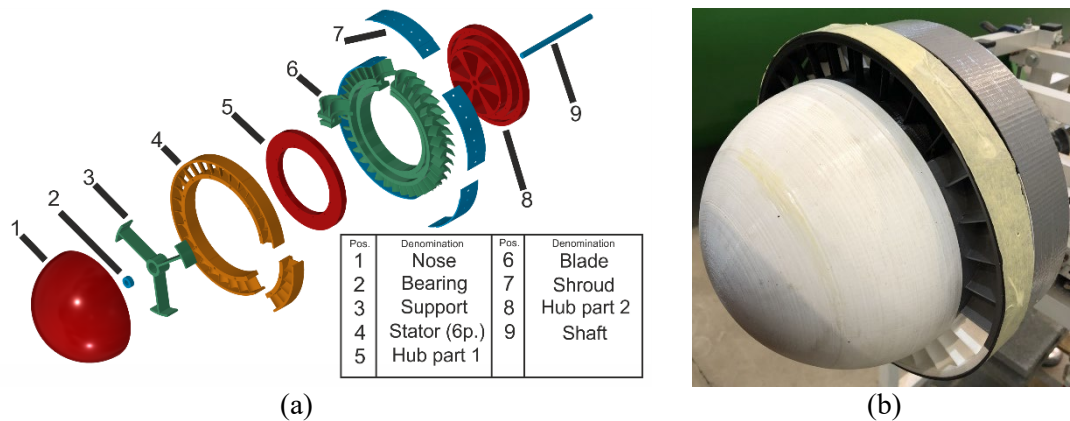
(a) Exploded view of the turbine. (b) FDM axial turbine prototype.
